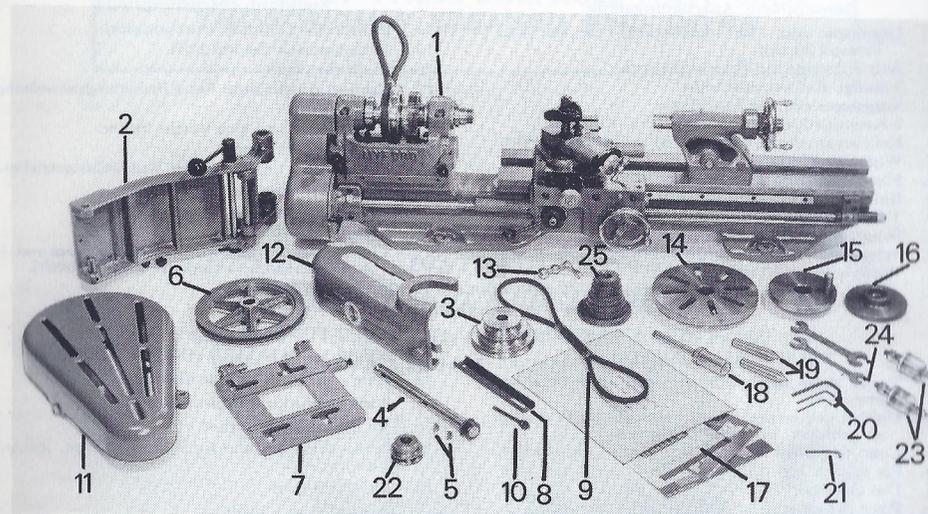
Illustration shows ML7 Lathe with standard equipment dismantled for packing.
